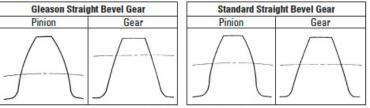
The Tooth Profile of Straight Bevel Gears
